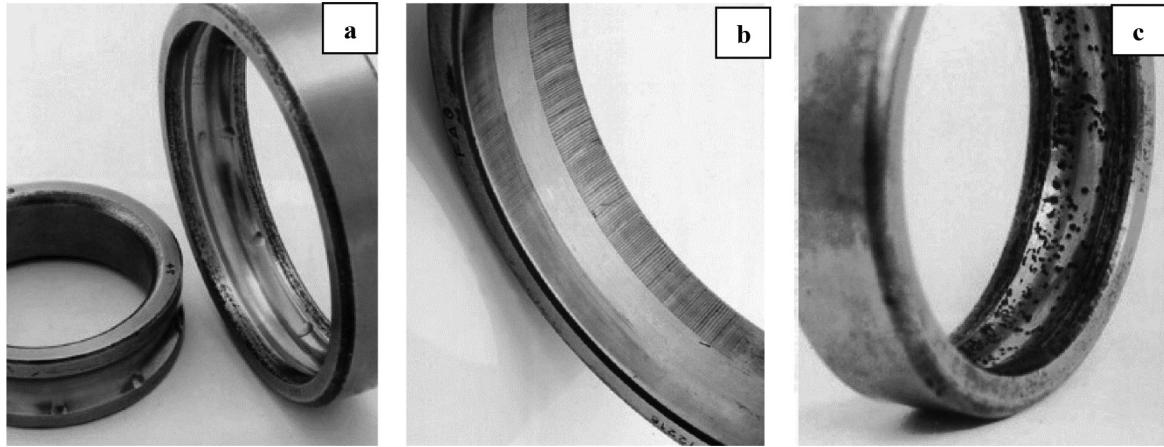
(a, b, c) Outer race defect of the ball bearing.
